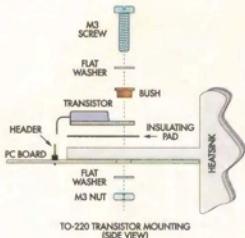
the leads of the TO-220 (Q8 & Q9) packages are too short to reach all the way through the PC board. Simply bend the leads so that they touch the header pins instead. Again, don't solder the leads until the mounting screws have been tightened.
